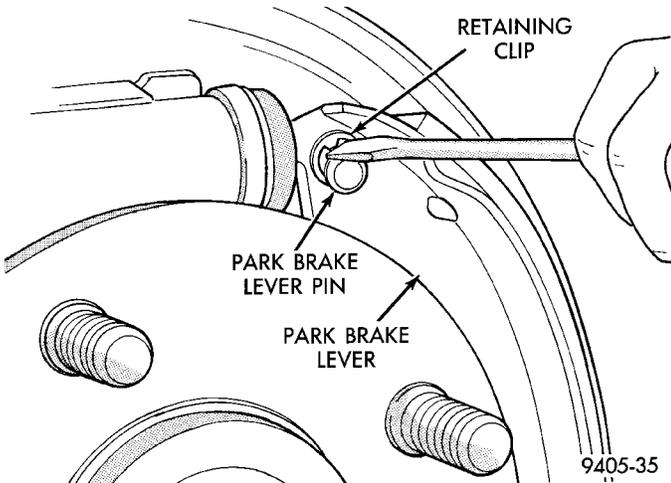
Park Brake Lever Pin To Brake Shoe Retaining Clip
